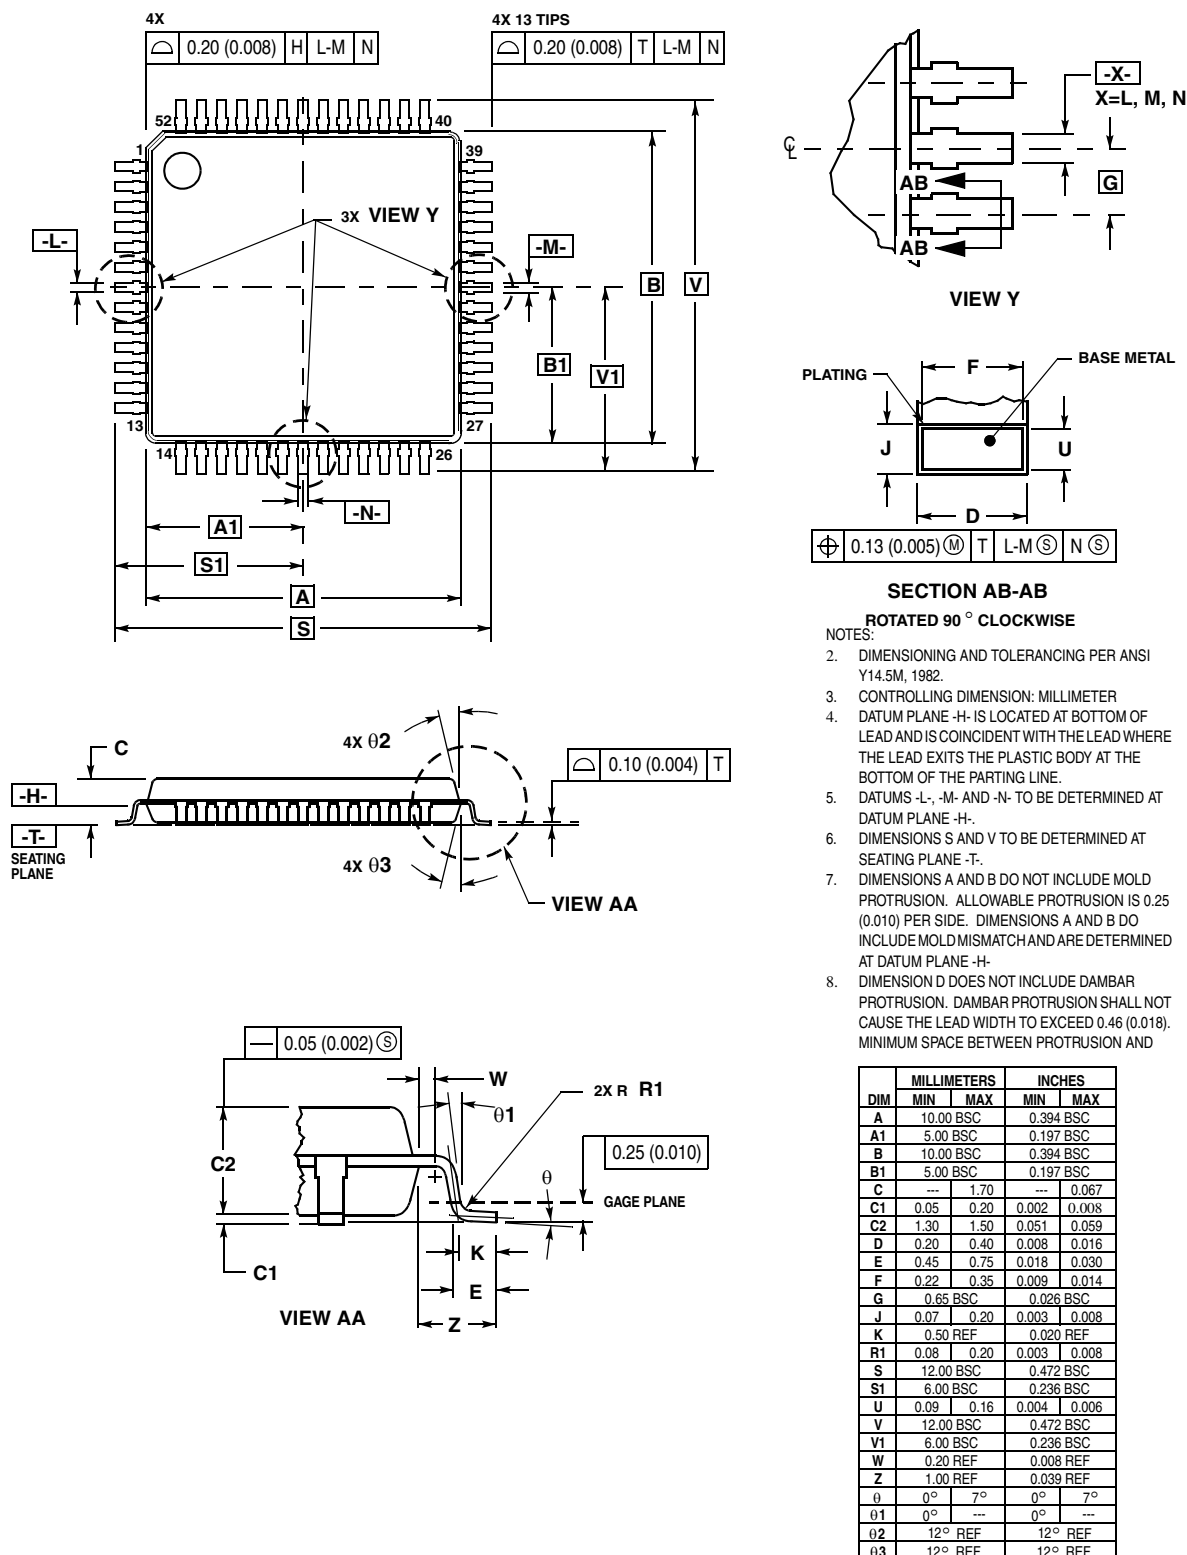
52-pin LQFP Mechanical Dimensions (case no. 848D-03)
